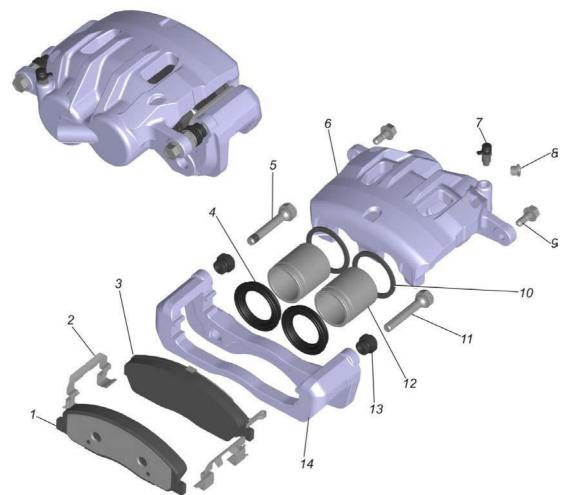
Front brake composition: 1 -external brake shoe assembly; 2 -brake shoe springs; 3 -internal brake shoe assembly; 4 -piston protective cap; 5 -lower guide pin; 6 -brake caliper body; 7 -bypass valve with cap; 8 -protective plug; 9 -guide pin bolt; 10 -O-ring; 11 -upper guide pin; 12 -piston; 13 -pin boot; 14 -base
